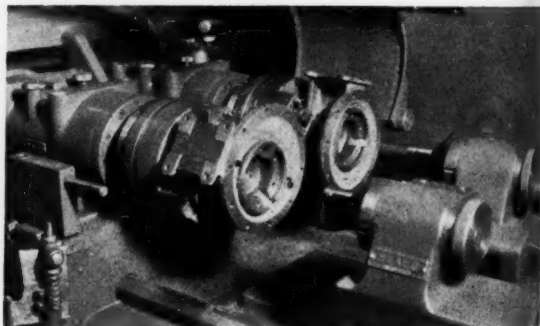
Shaft bearing holes in compressor bodies are bored in this "Heald Red Head" diamond boring machine. The holes are finished to 3.505 in. within a tolerance of 0.0003 in.
